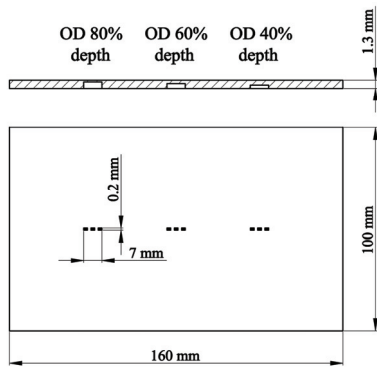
View of the test specimen made of Inconel (OD-outer defect)
